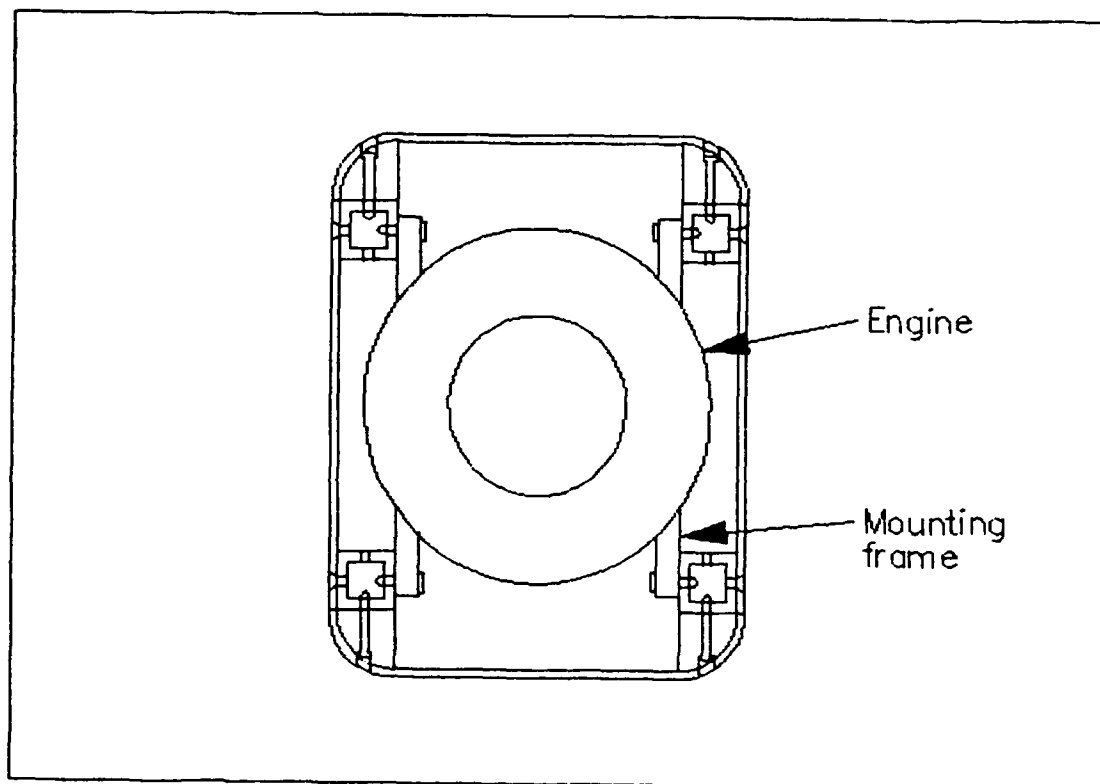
Cross-Section View of Engine Mounting in Fuselage
